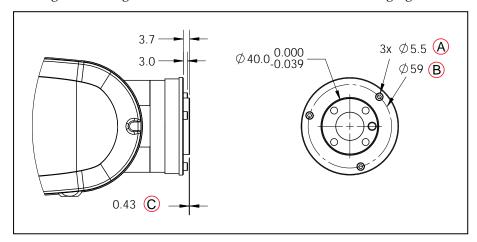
J6 Cleanroom Cover Dimensions (units in mm)
